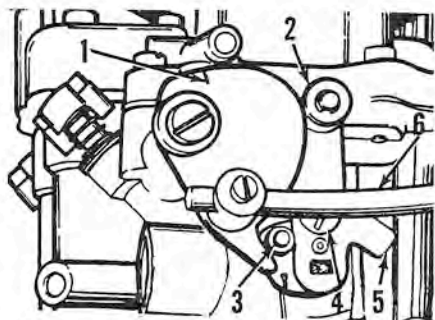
A—When adjustment is properly made, projection on cam will contact roller (3) to slightly cut back the throttle when full advance is passed.
